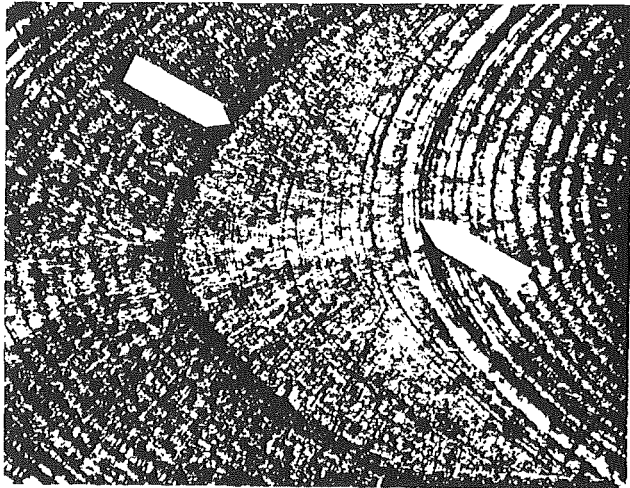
Solidification zones occurred during peak duration (as marked by arrows) and background duration (unetched and unpolished weld surface, 37.5X) [16]; stainless steel 304L; pulsed-current gas tungsten arc welding; $I = 150$ A; $t_p = 295$ A; $I_b = 5$ A; arc voltage = 10. volts; frequency = 3.3 Hz; travel speed = 15.1 ipm (0.64 cm/s); $t_p = 0.15$ s; $t_b = 0.15$ s
